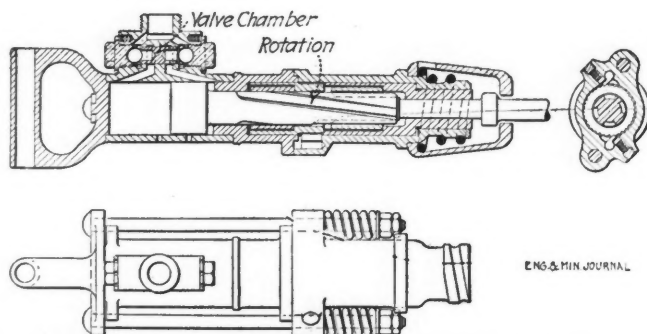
AUTOMATICALLY ROTATING PLUGGER
